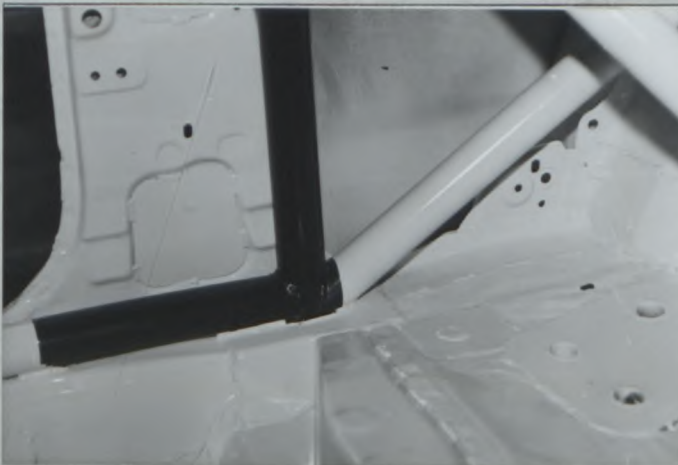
(FRONT TURRET CROSS SUPPORT)
